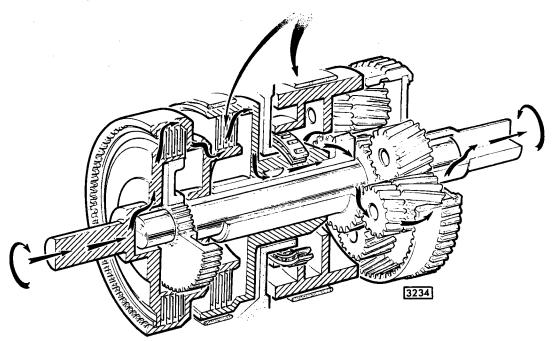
Mechanical power flow-Reverse gear (R) selected.
